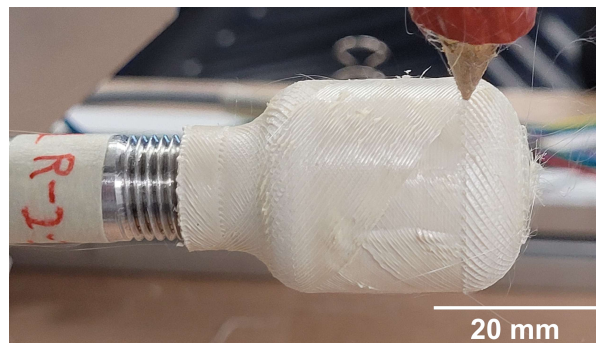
Specimen R-2-1 being printed, with the ± 55 layers visible
